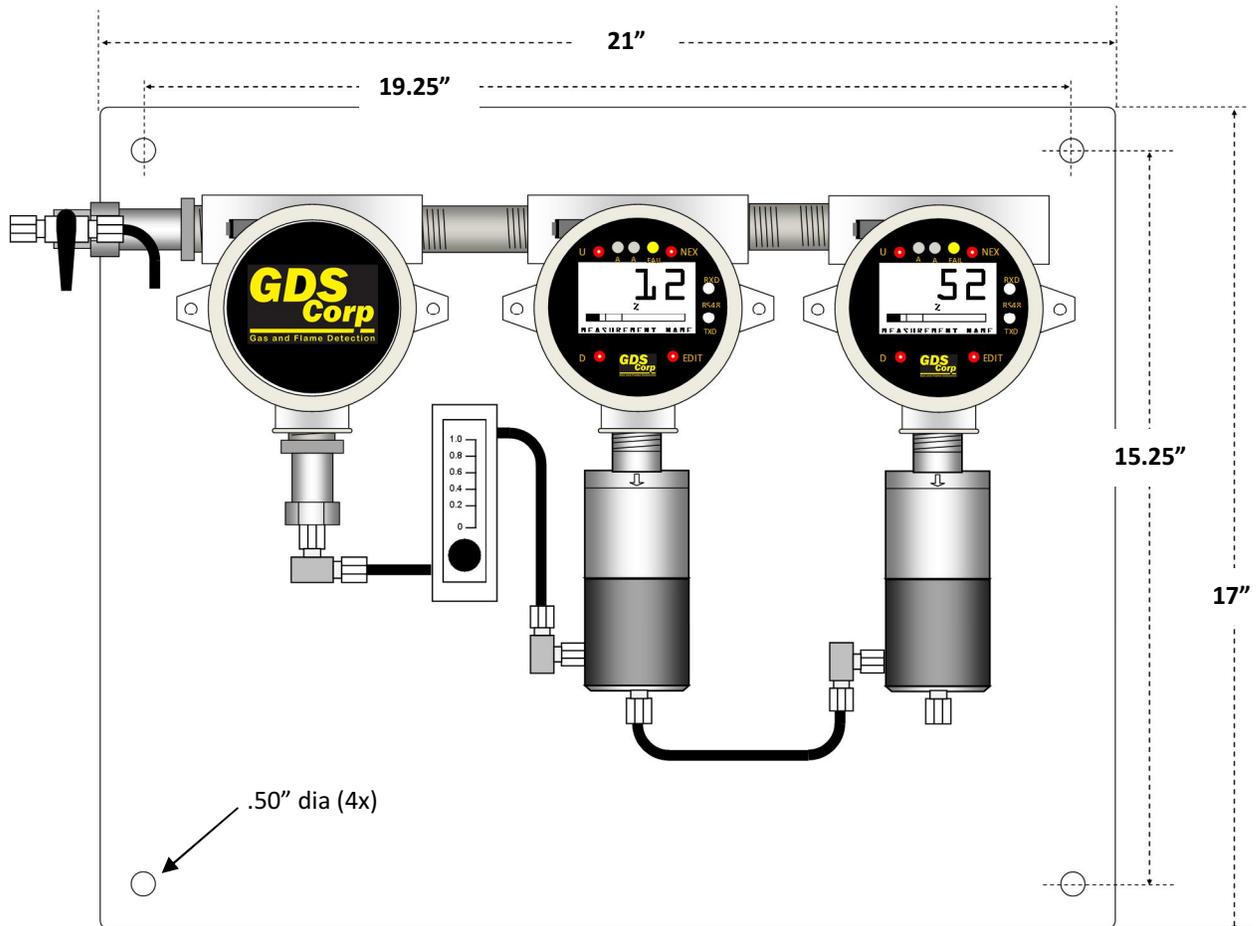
GDS-68XP 21" x 17" Mounting Plate Dimensions (AL Enclosures)
